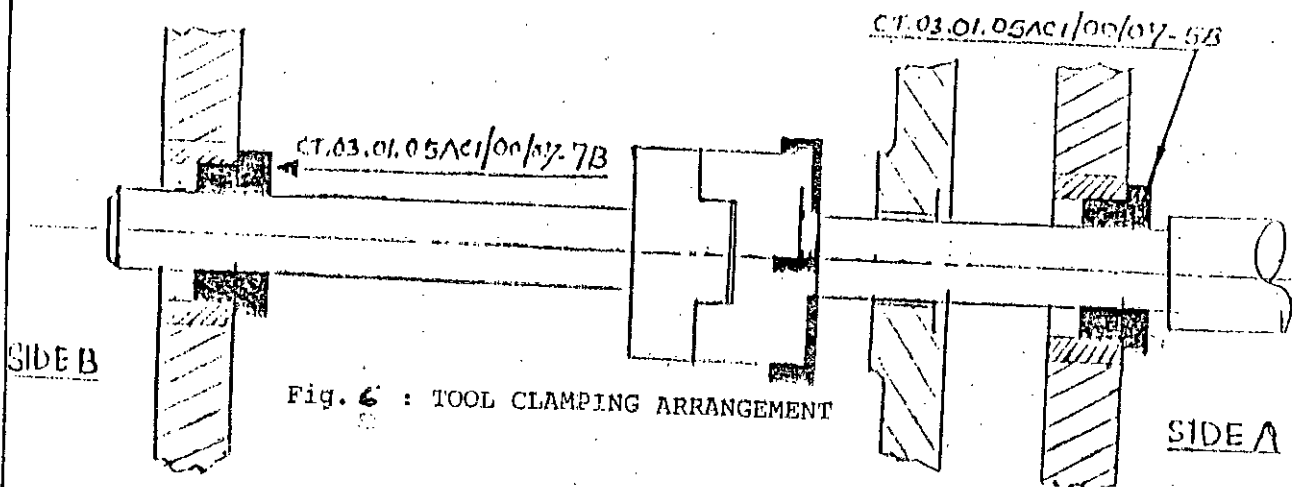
TOOL CLAMPING ARRANGEMENT
